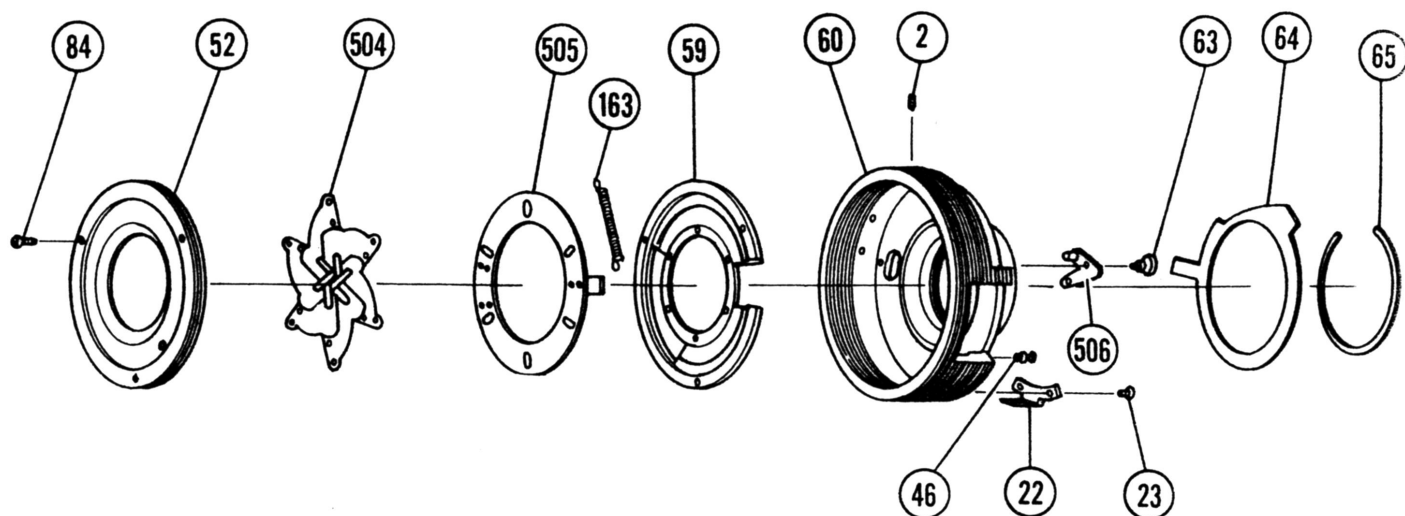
Diaphragm Housing Assembly, Nikon AI Mount
